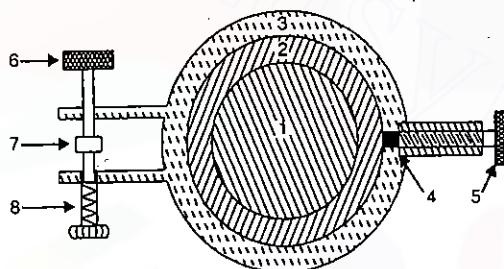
CLAMP AND TANGENT SCREW FOR LOWER PLATE.
